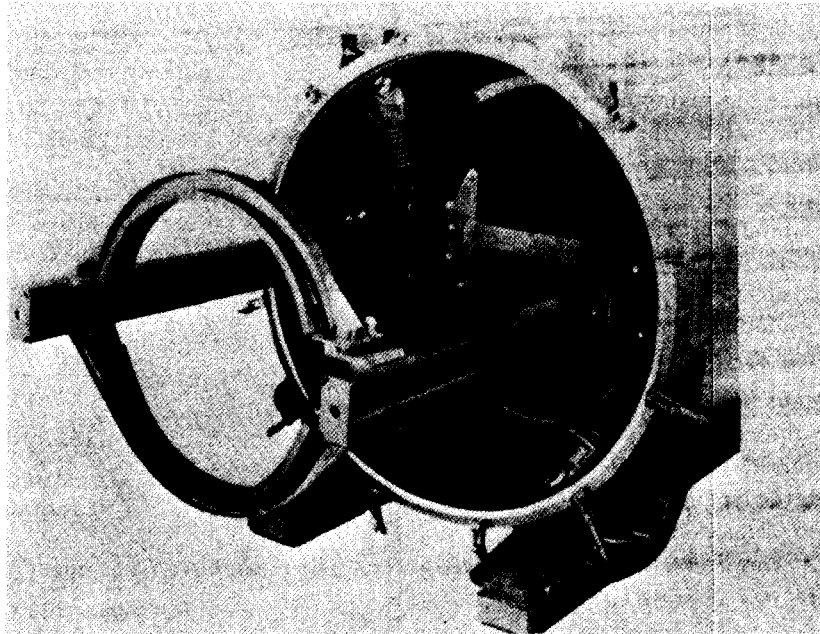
End View of NIKE-HERCULES Container Showing Spring Suspension System and Roll-out Mechanism (Damping is provided by tubular-type shock absorbers mounted inside the coil springs.)
